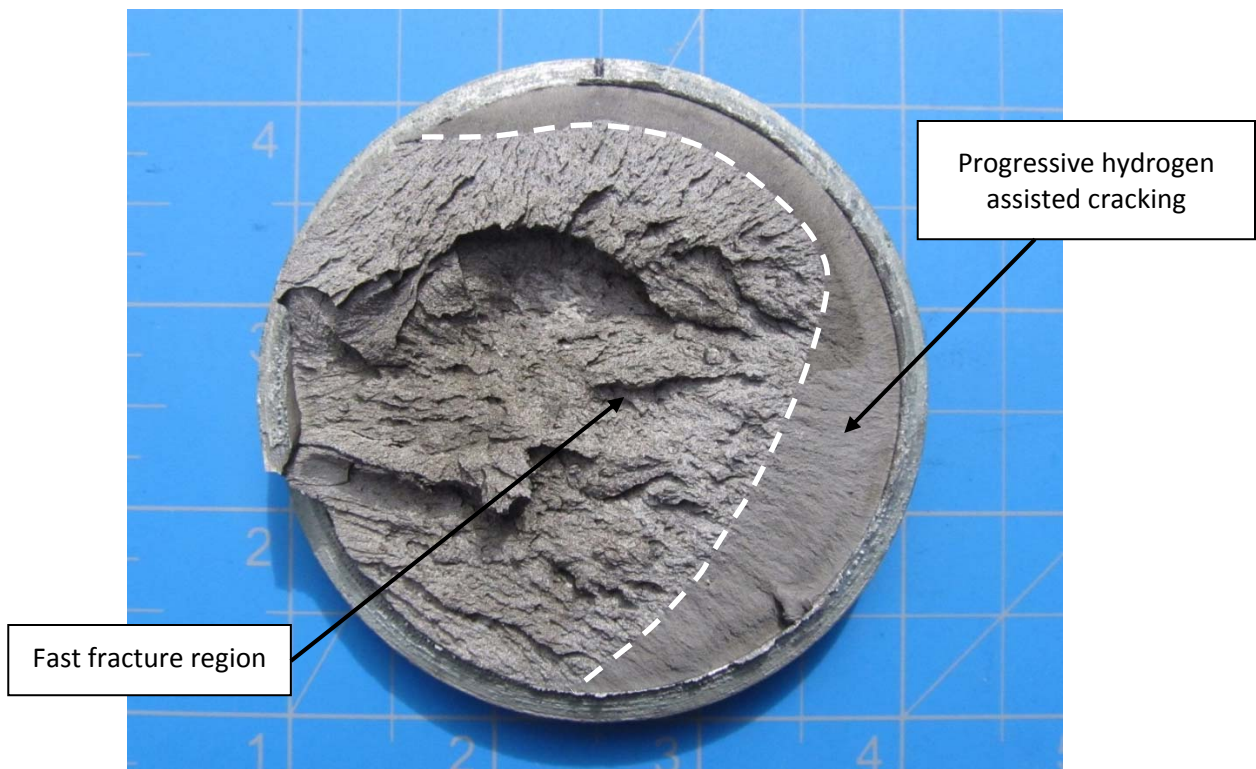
The fracture surface showing progressive hydrogen assisted cracking and fast fracture areas.
